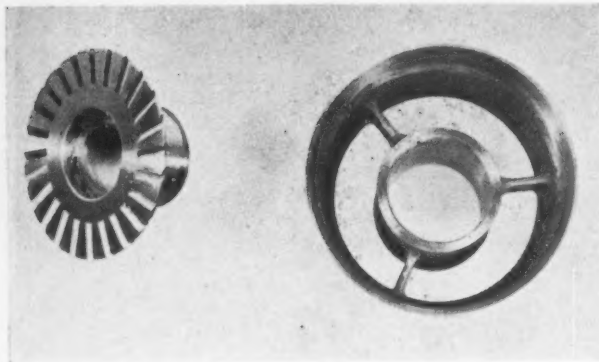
Investment-cast Outer and Inner Components for the Assembly in Fig. 7
